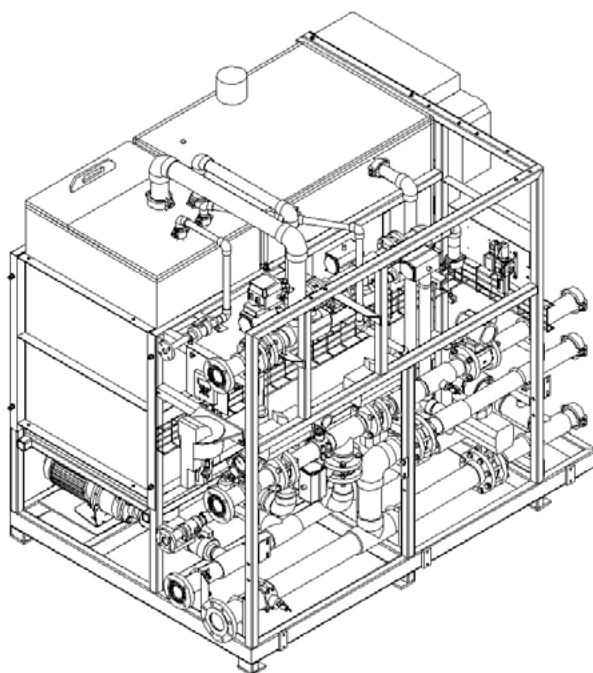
VALVE SKID INSTALLATION FINISHED
